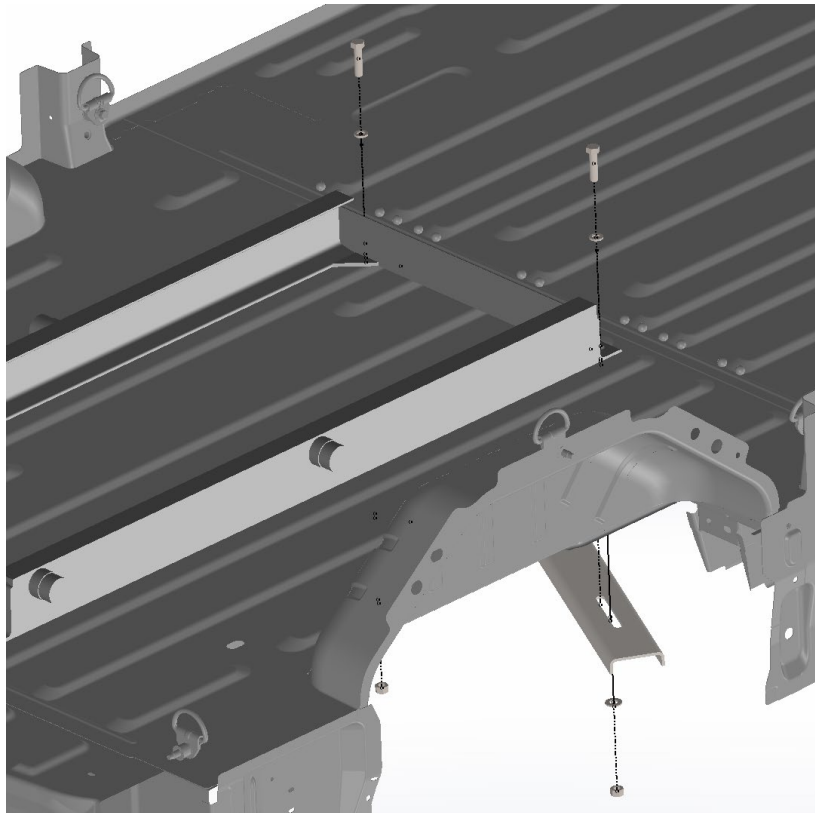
Transit Anchor Plate Install (148" WB Shown)
